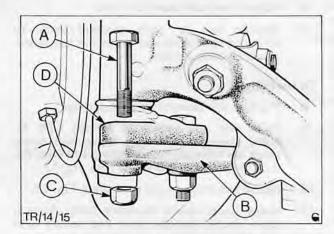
Removing nuts and bolts securing steering arm to spindle body
